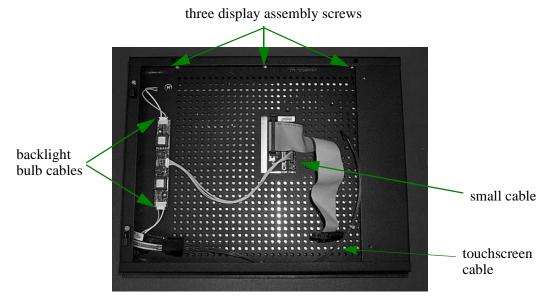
Sharp (15" Unit) Display Assembly Cable Locations
